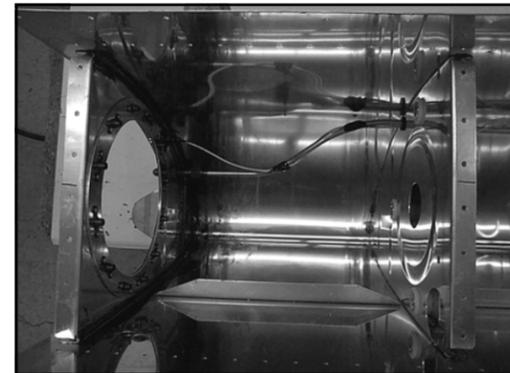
An interior fuel tank rib, riveted and sealed.
